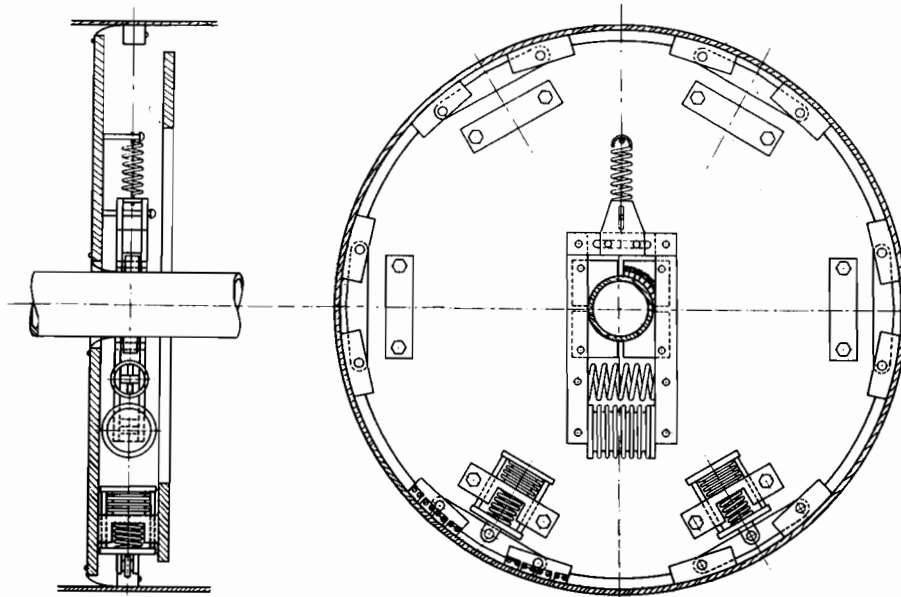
Schematic view of the shorting bar showing typical clamping springs and metal bellows.
